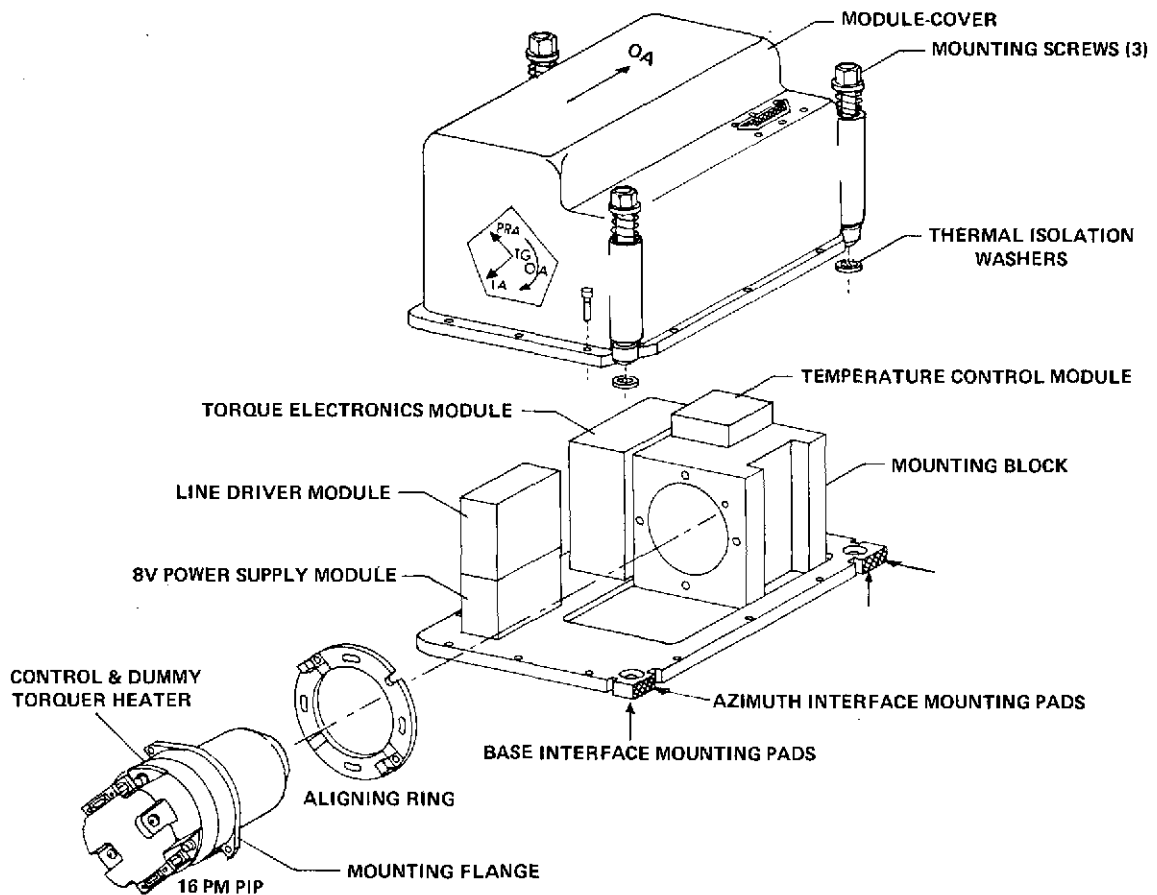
Accelerometer Module Mounting & Alignment
